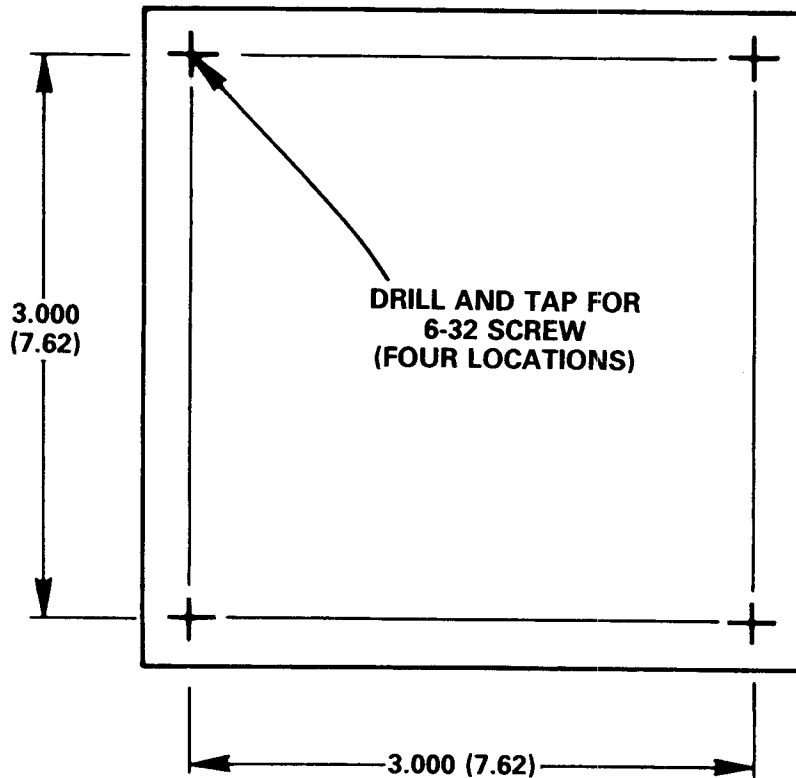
Interface Boards Surface Mount Dimensions
